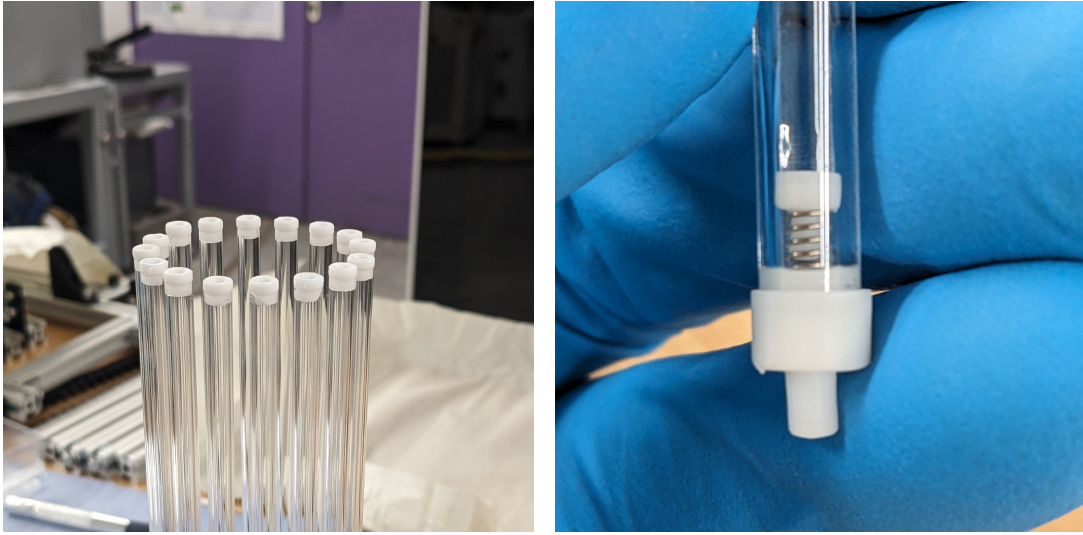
Left: Bubo fibres after attaching to top parts. 3D printed stands are used to hold 16 fibres at once while assembly and curing of the resin. Right: Lower part of a finished Bubo fibre.
